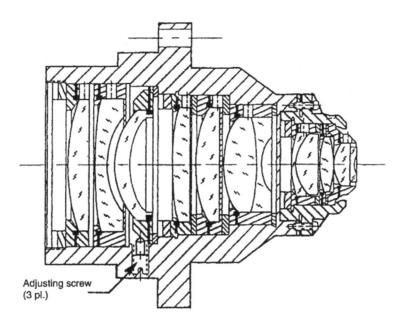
Sectional view of a poker chip type lens assembly with one lens element adjustable to allow optical performance to be measured and optimized after final assembly. (From Vukobratovich.¹⁰)
